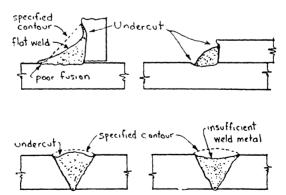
Examples of typical welded joint faults, cross-sectioned
